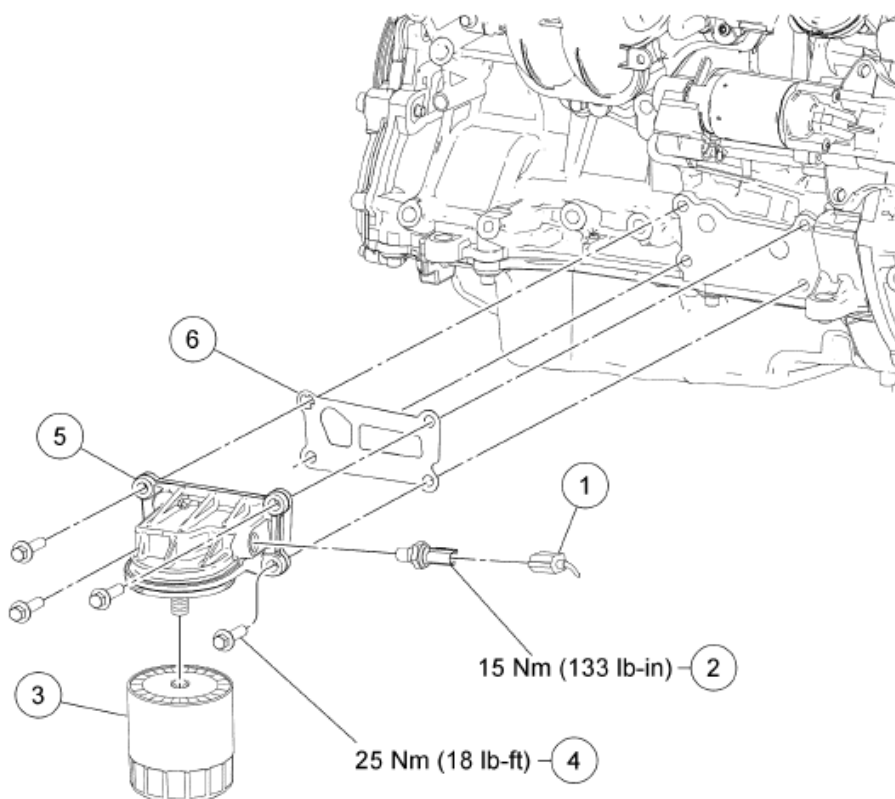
Identifying Oil Filter Adapter, Oil Filter Element And Engine Oil Pressure Switch
